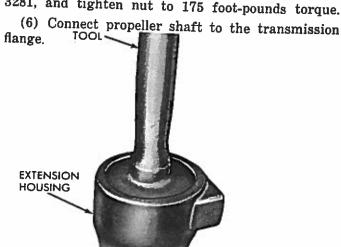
Removing Output Shaft Oil Seal (Tool C-748)
